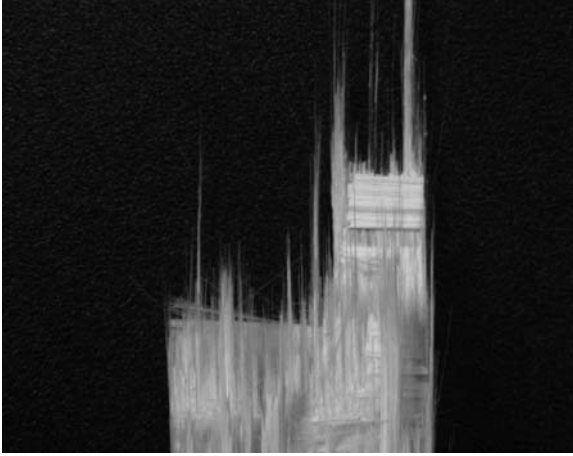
Tensile Fracture Surface of N610/Monazite/Alumina at 900°C
